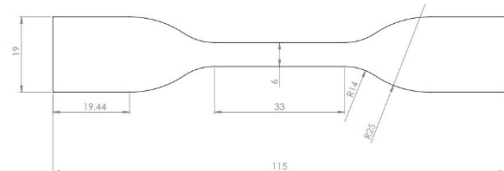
Geometry of the ASTM D638 Type IV tensile test specimen.
